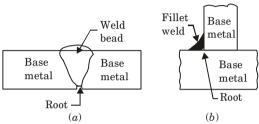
(a) Incomplete penetration at the root of a butt weld. (b) Incomplete penetration at the root of a fillet weld.
